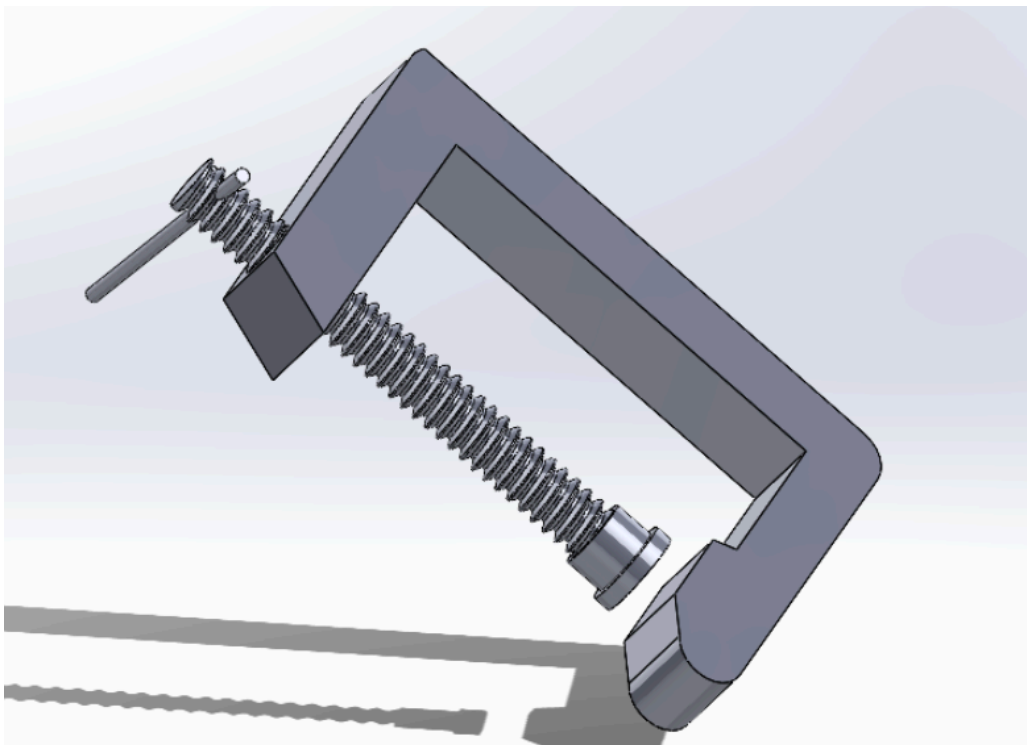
Initial Solidworks Assembly File for the C-Clamp
